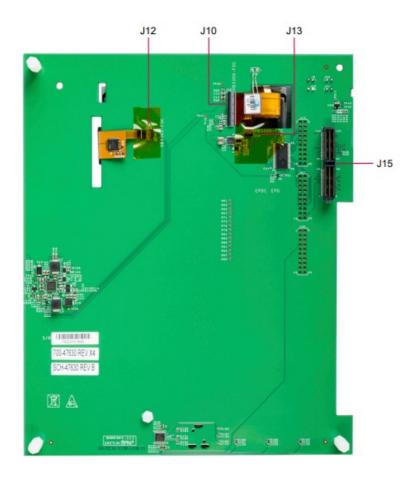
shows the top-side view of the IMXEBOOKDC5 board.
